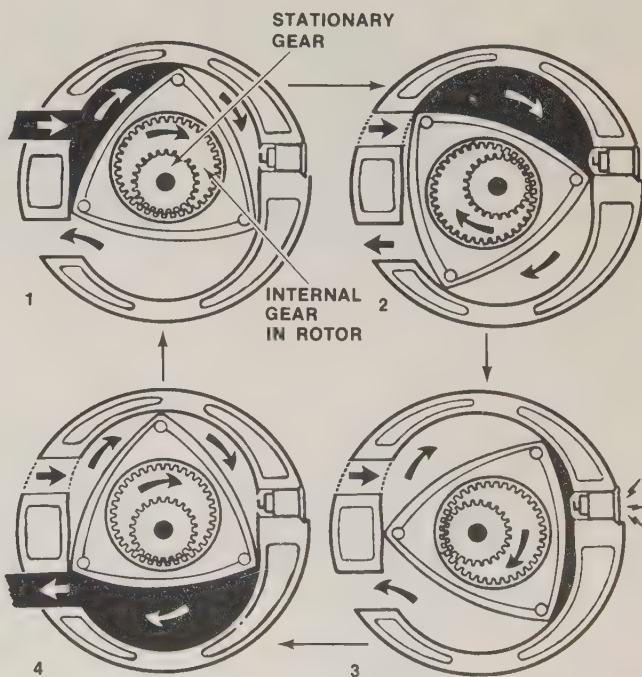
How the rotor rotates eccentrically around the stationary gear. It follows an orbit that keeps all three apex seals in sliding contact with the rotor housing. (Toyo Kogyo Company, Ltd.)
